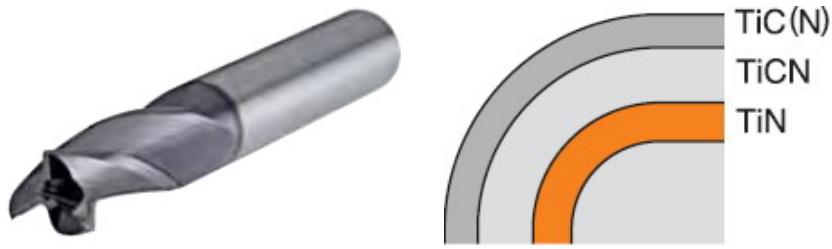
Used milling cutter F3AH1800ADL30 with coating specifications
